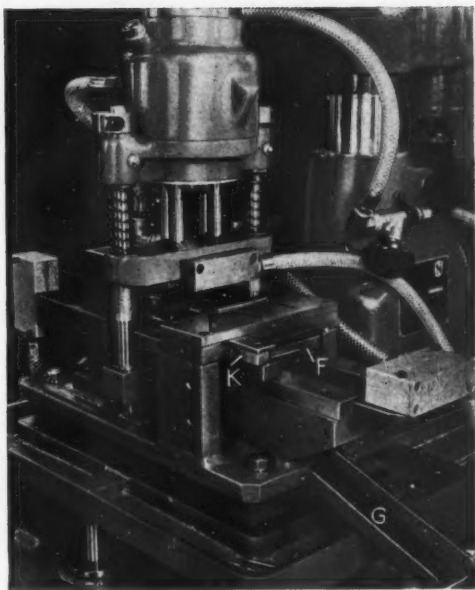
This close-up view shows the fixture and gearless multi-spindle attachment mounted on another S.P.K. bench-type machine for drilling two 0.0465-in. diameter cross holes in each of two small-diameter spindle components. The machine operates on a fully-automatic continuous cycle
